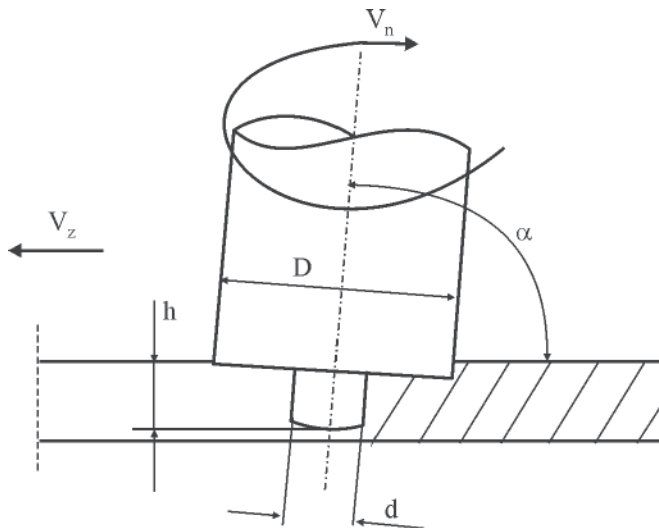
Schematic diagram of FSW method [9]: D – tool diameter, d – pin diameter, h – pin length, α – angle of tool deflection, V_n – Mandrel's rotary speed, V_z – Welding speed
